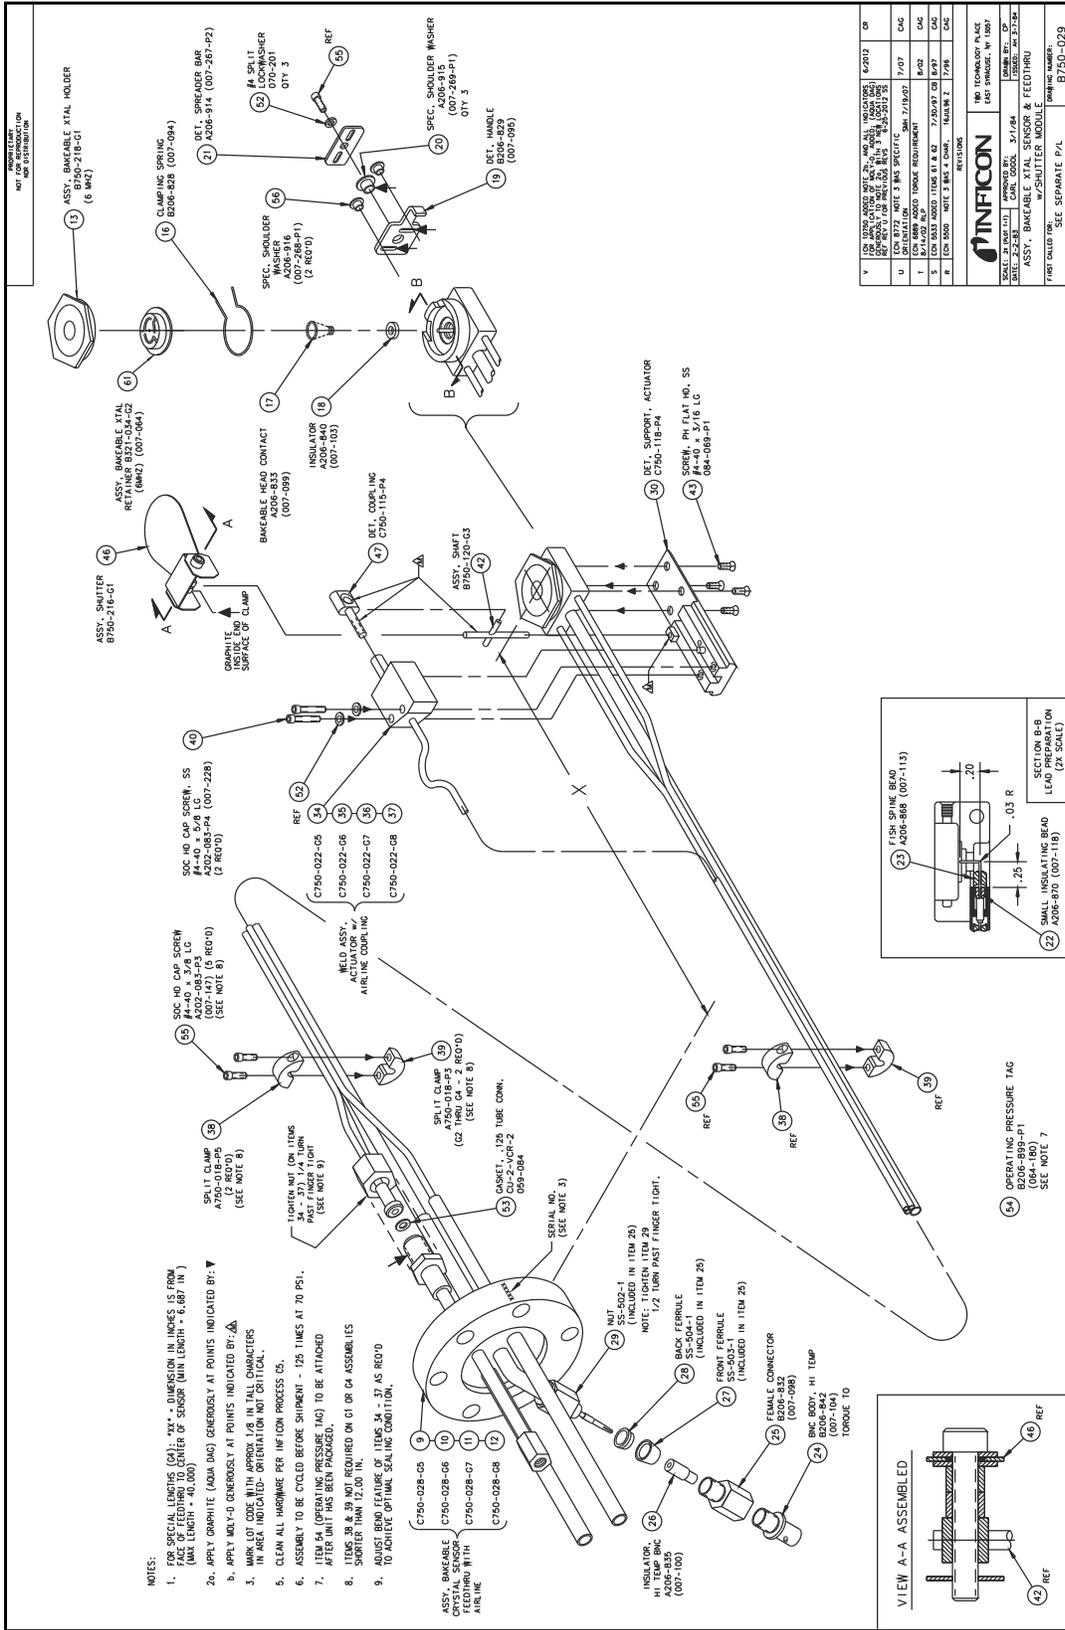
Shuttered UHV Bakeable Sensor with feedthrough assembly
